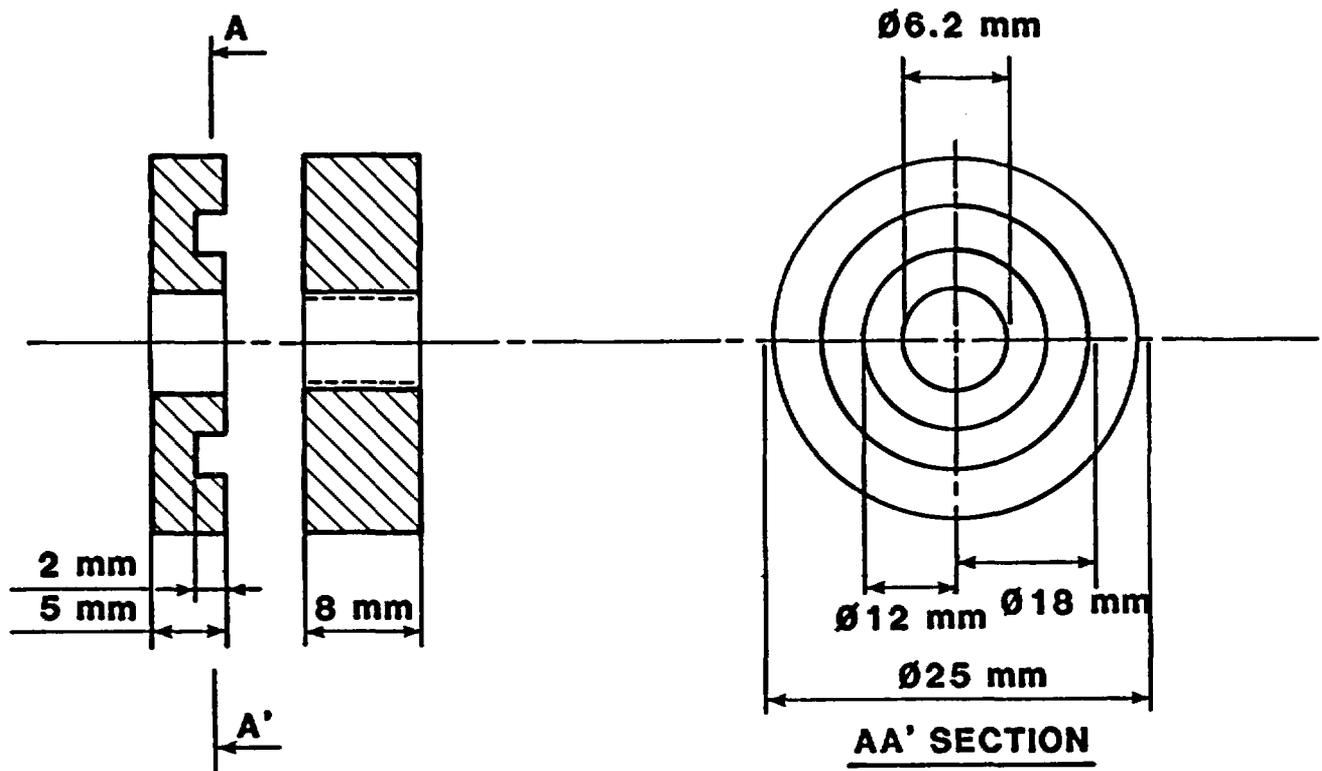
Compression Set Fixtures Used for 82 J3 and 82 J4 French O-ring Seal Samples
